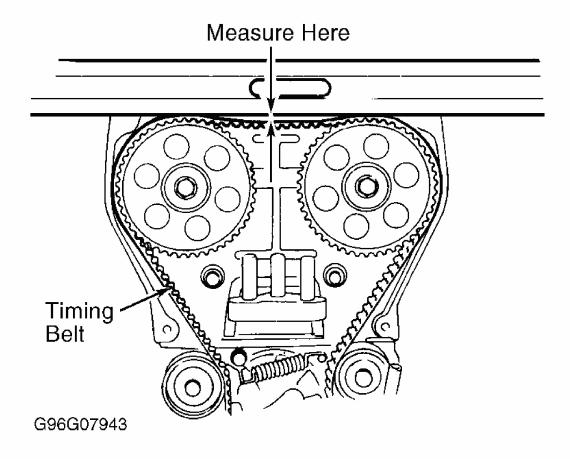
Measuring Timing Belt Deflection Courtesy of MAZDA MOTORS CORP.
